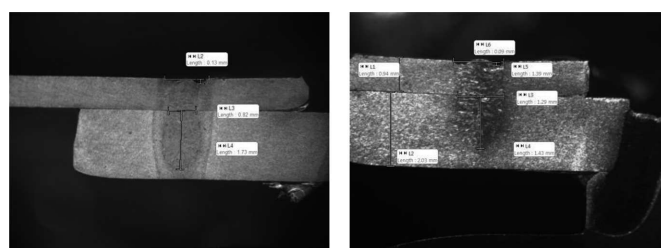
Good quality of laser weld, 80% of penetration
